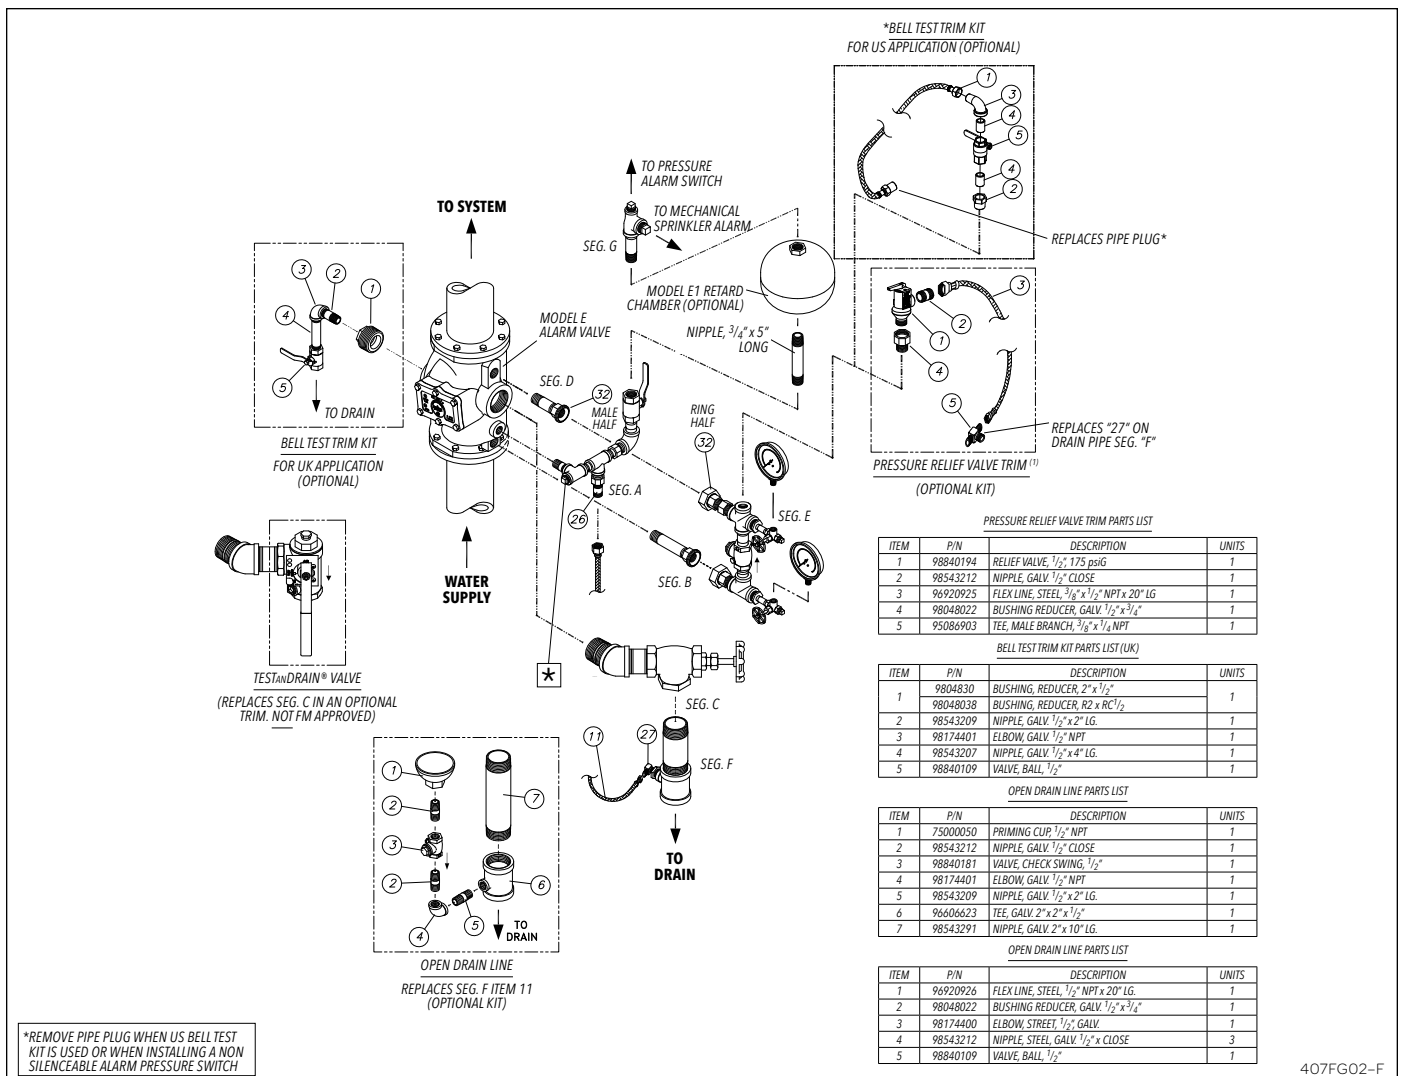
Model E 8² Flanged Inlet and Outlet Alarm Valve Variable Pressure Open Drain Trim
